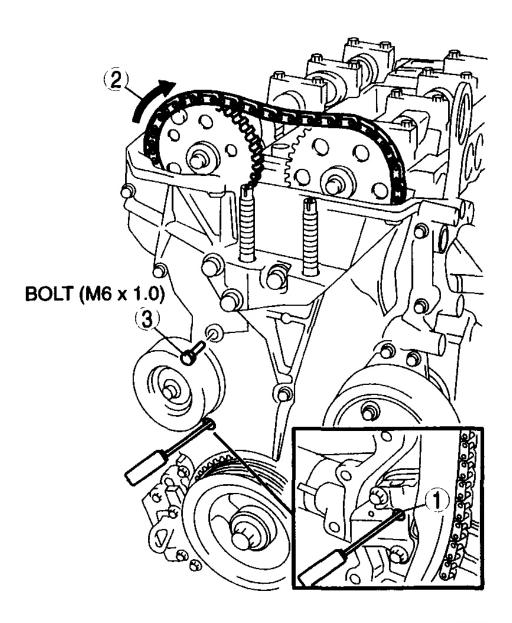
Locating Cylinder Block SST Courtesy of MAZDA MOTORS CORP.
